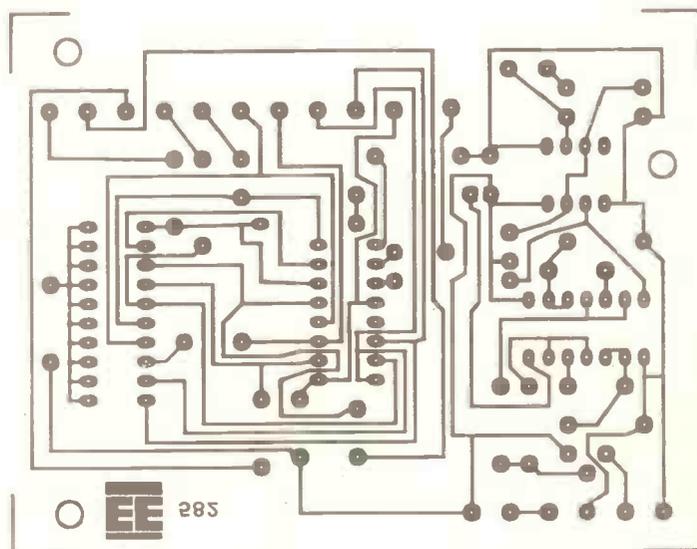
Full size printed circuit board master foil pattern, component layout and interwiring for the metronome. Note that a 20-pin d.i.l. socket must be used for mounting the bargraph display.
